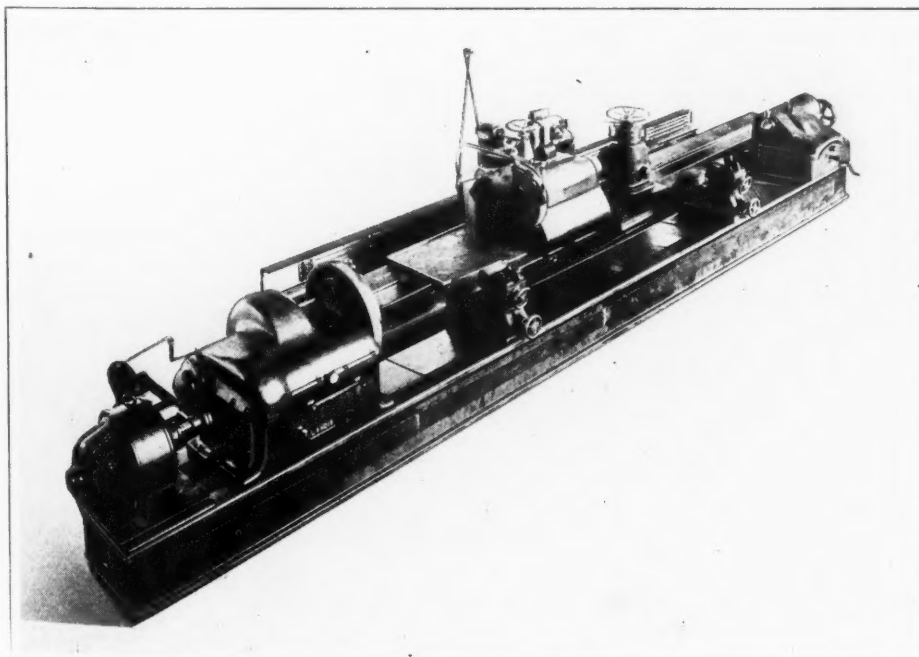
Landis Roll Grinding Machine which will take Work between Centers up to 52 Inches in Diameter and 24 Feet Long
